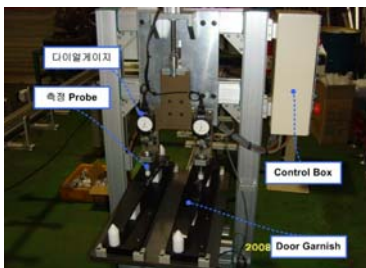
Figure of inspection system for deformed door garnish
